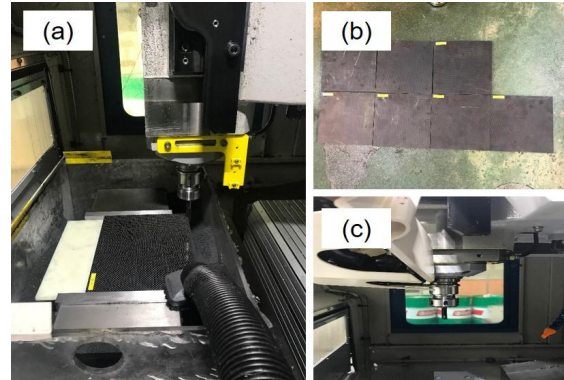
Experimental set-up for end milling(a: machining, b: CFRP, c: holder)
